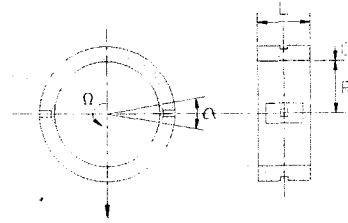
Geometry of a 2 Axial Grooved Bearing
